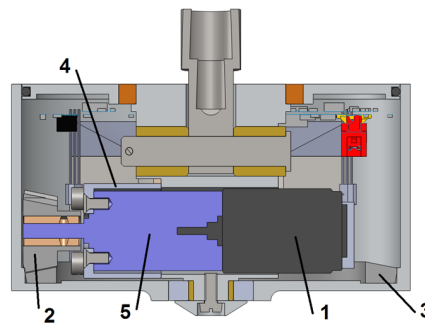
Cut view of the wheel: (1) motor, (2-3) conical gears, (4) motor support, (5) motor gears.
